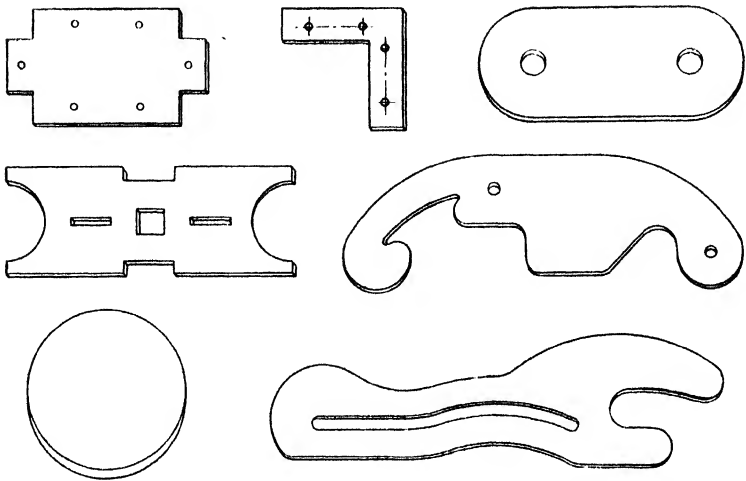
Typical examples of flats, which are punched or sheared and have flat surfaces.
